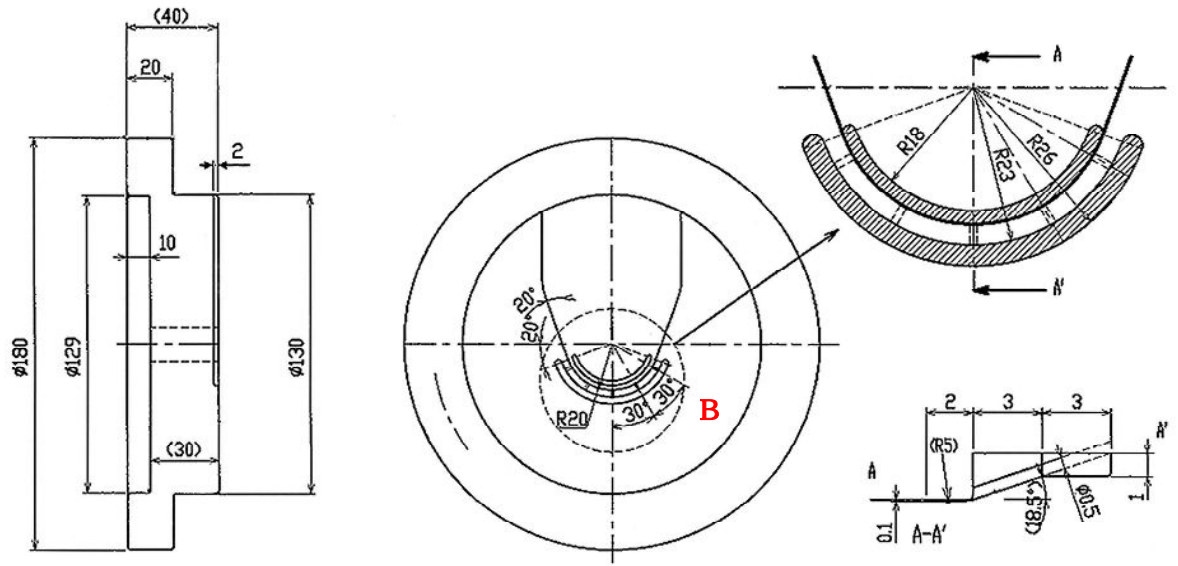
Principal dimension of upper extrusion die with lubricant pocket
